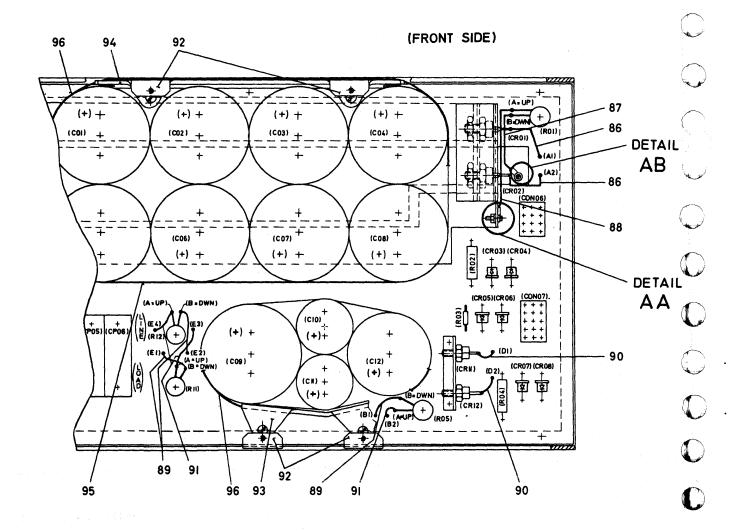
POWER SUPPLY ASSEMBLY, PS 105 (SHEET 3 OF 3, INDEX NO. 81 THRU 96)
